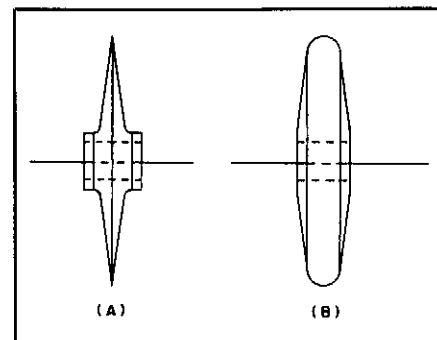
The original cutting roller (A) and a new forming roller (B) used to work tubing for a snug fit. (The exact shape of the new roller is not important. It should be ground from solid steel and have the same hub width and outer diameter as the cutting roller it replaces.)
